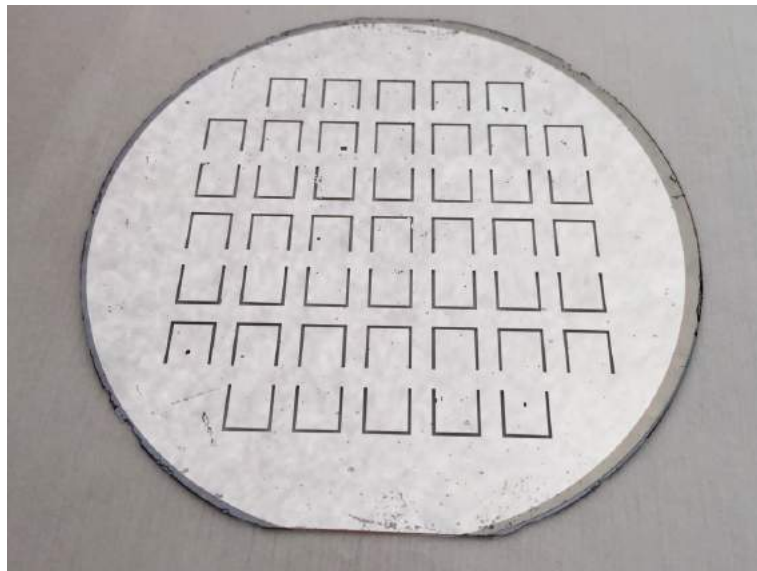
Resulting wafer when performing the KOH etch without removing the TEOS-deposited oxide layer. A metal layer is included.
